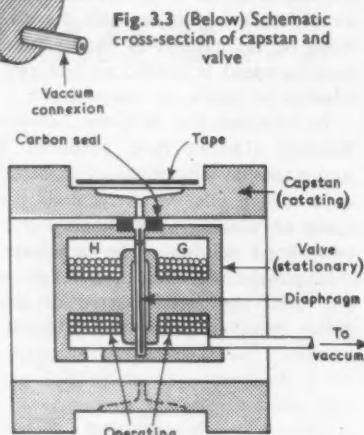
(Below) Schematic cross-section of capstan and valve
